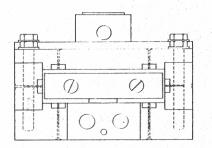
Modified glue-block shear tool for shear testing glue joints in cylindrical specimens.
